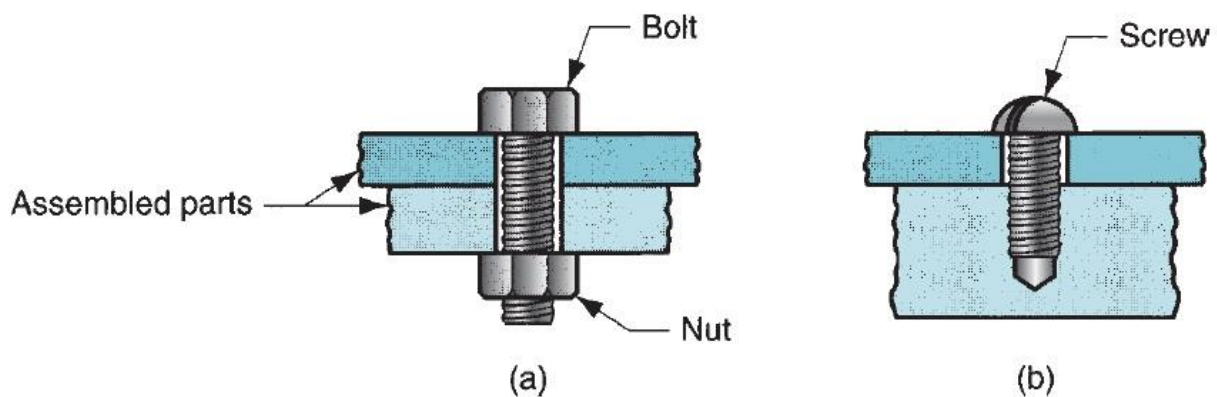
Typical assemblies using: (a) bolt and nut, and (b) screw.
